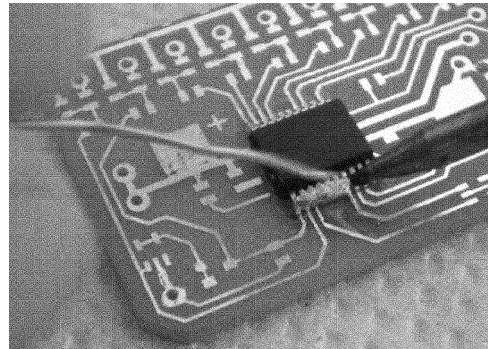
Pass along both rows of pins with the soldering iron and melt solder onto them.
